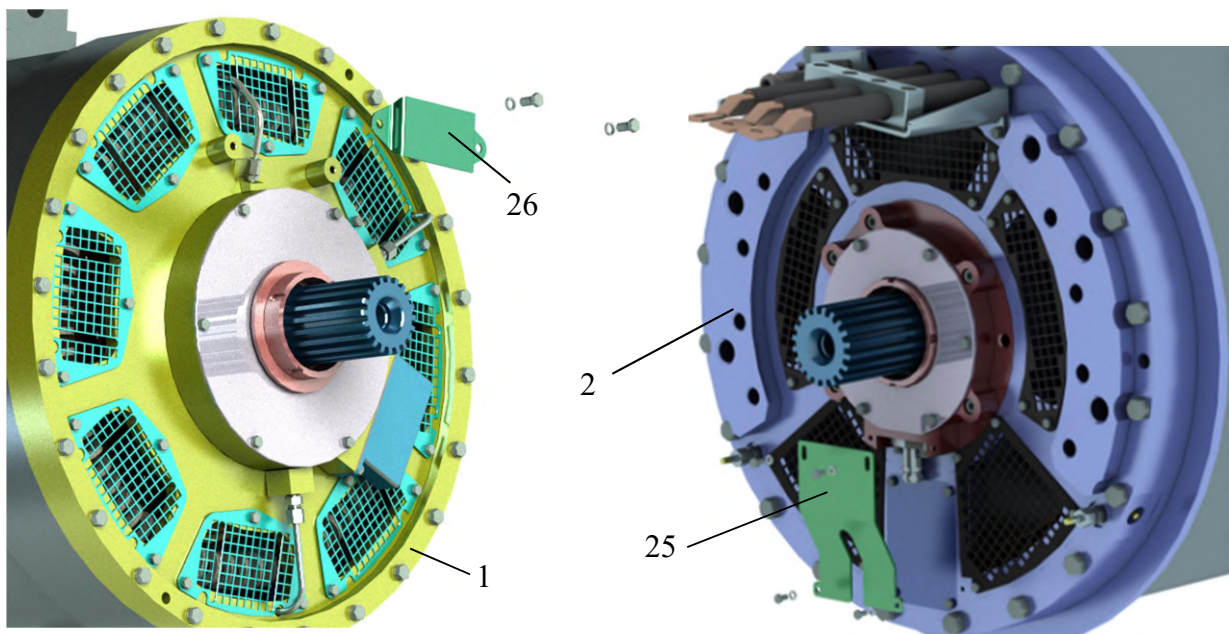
Installation of Bearing Speed and Temperature Sensor Cover
